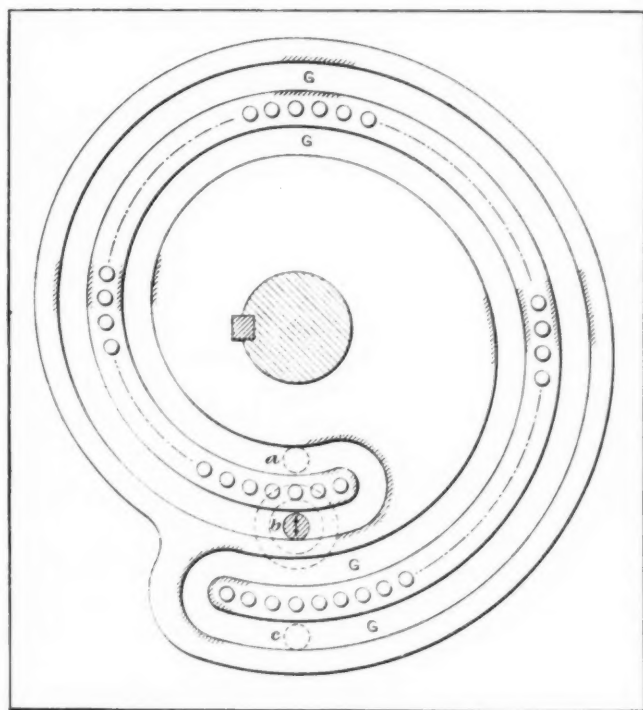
Pin Type of Mangle Gearing Arranged to Reverse Driven Shaft after One Complete Turn
